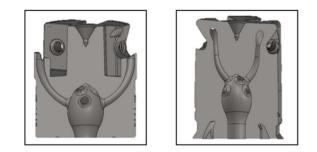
Milling tools with complex internal cooling channels¹²⁸.
